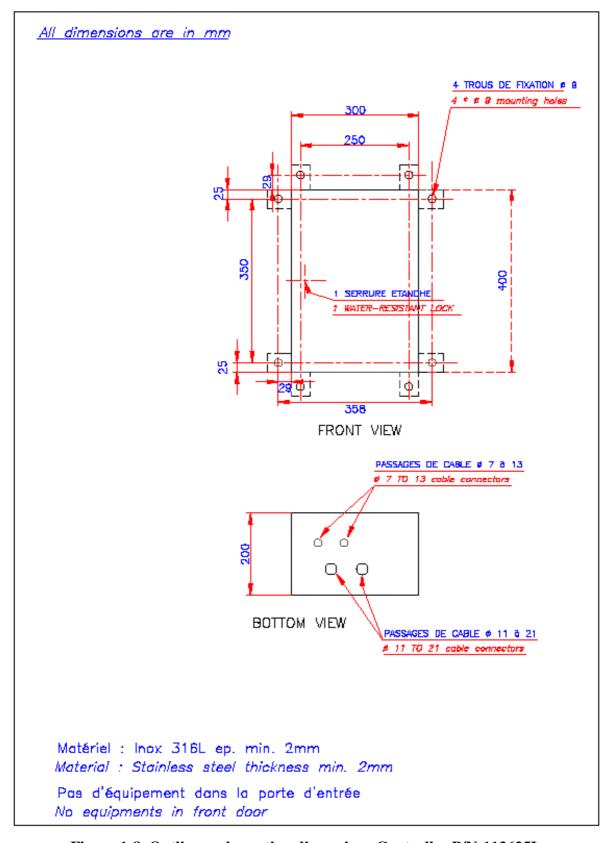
Outline and mouting dimensions Controller P/N:113625L
